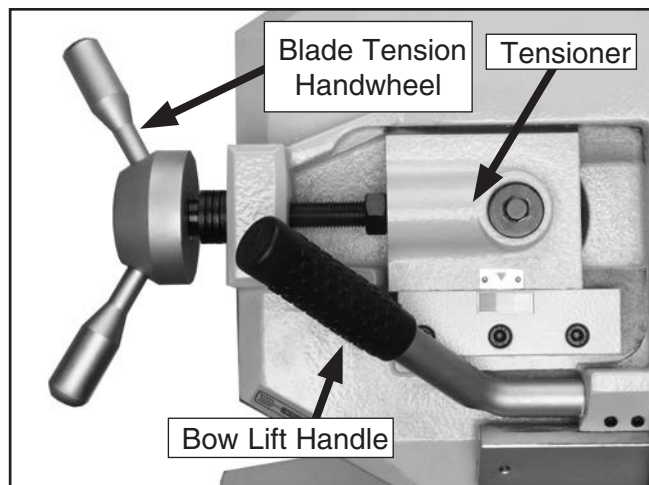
Blade tension handwheel, tensioner, bow lift handle.
